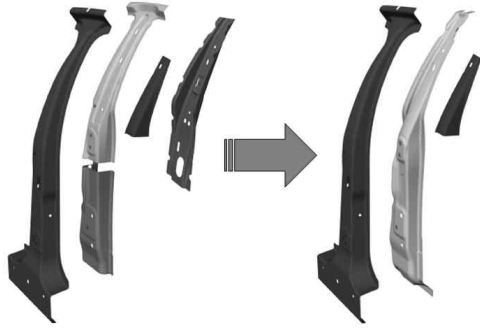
Sub-assembly price and tooling investment reduction in comparison to the equivalent cold forming solution.
